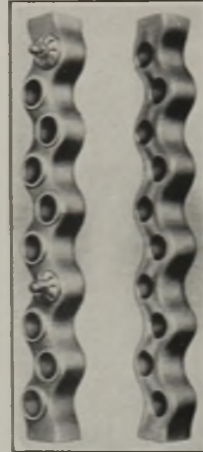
Wrought-steel inclined header in Babcock and Wilcox boiler.
